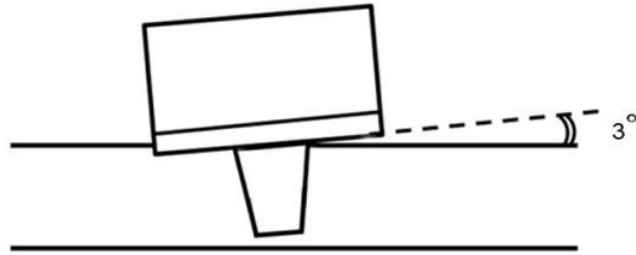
Tilt angle between the surface of the weld and the FSW tool. ([Pourahmad et al., 2013](#))
